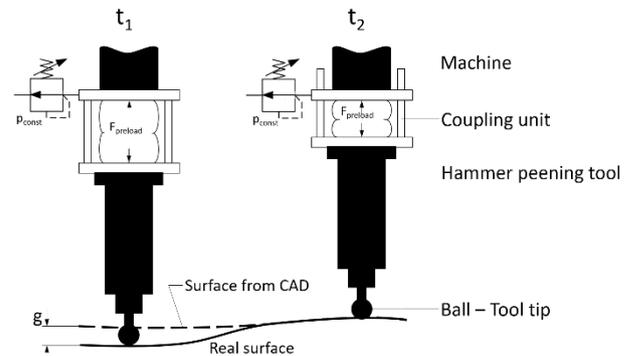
Design of the piezo actuated peening tool with the mechanical coupling unit
